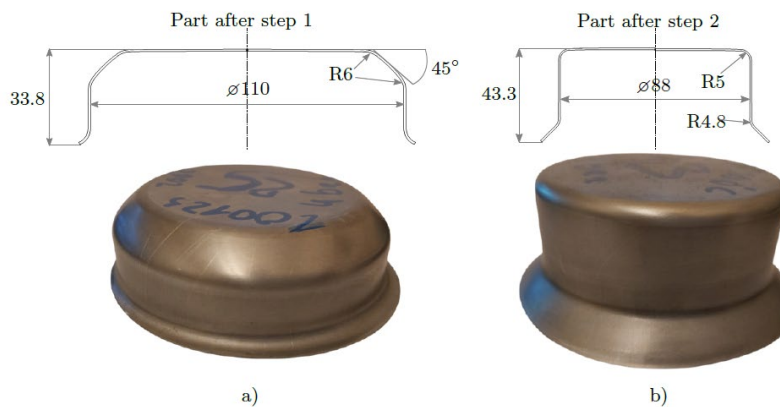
a) Dimensions (in mm) of the part after step 1 and b) after step 2 [9].
